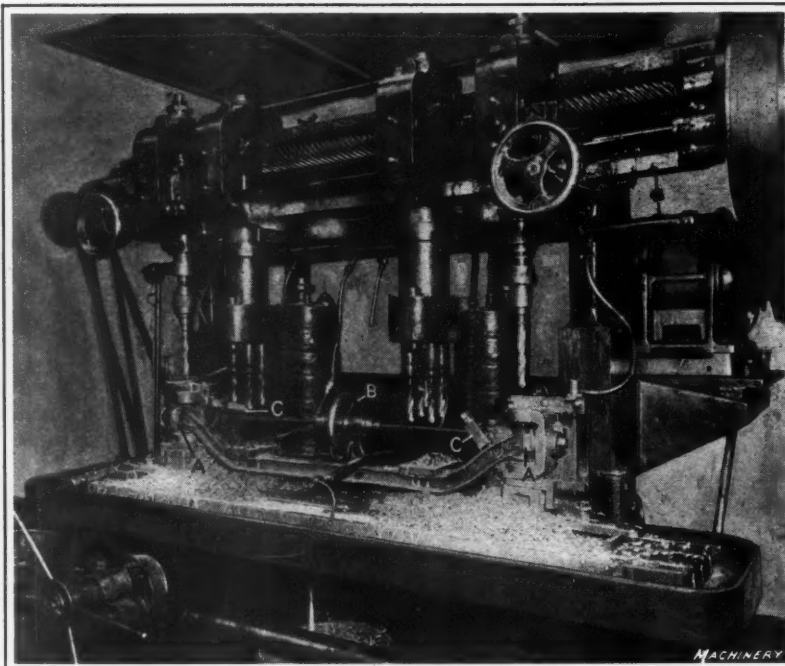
Multiple Drilling Machine equipped with Two Single Drills and Two Cluster Heads for simultaneously drilling Twelve Holes in Front Axles
